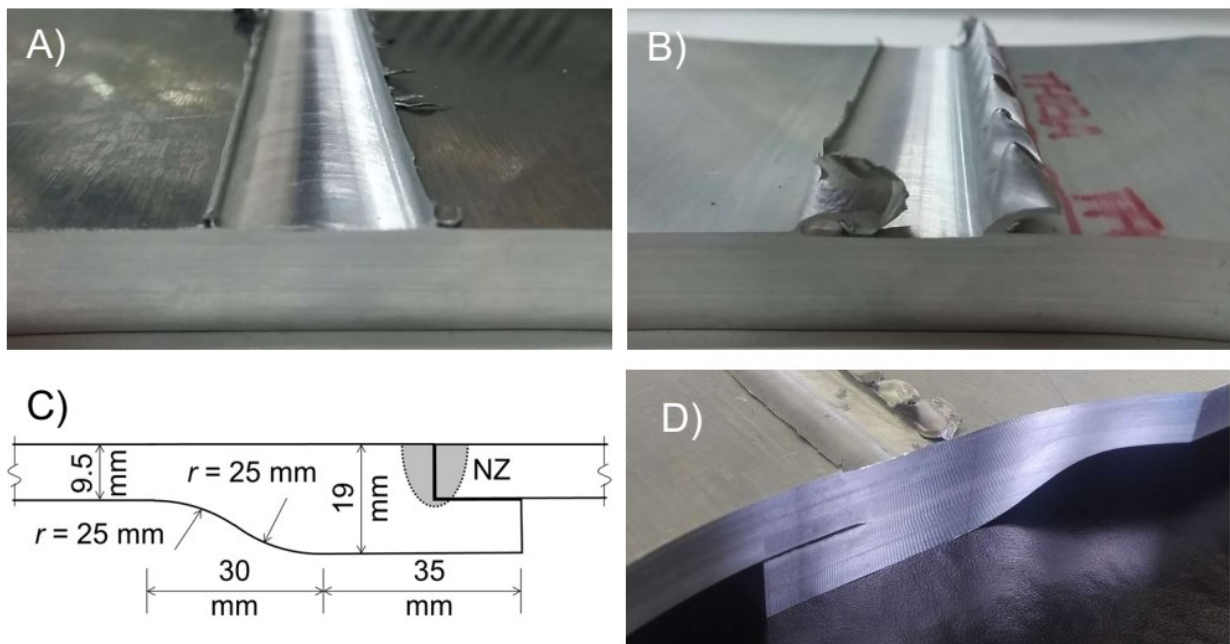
Specimen profiles: (A) 6061 proper weld profile, (B) 6061 toe flash weld profile, (C) lap joint detail, and (D) lap joint weld profile
